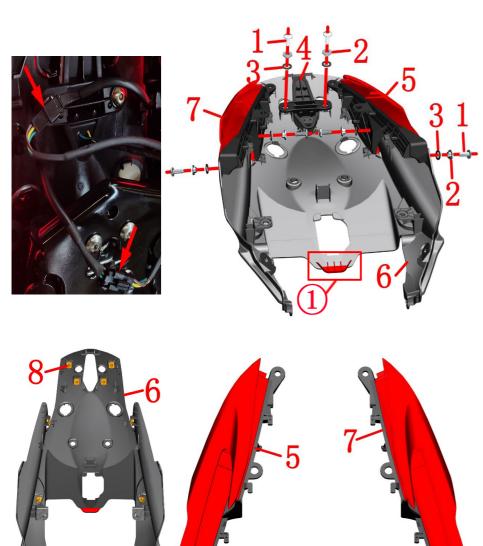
REAR COVER		Tail skirt taillight component 4	CHK
